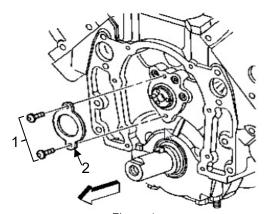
Camshaft Retainer (2) and Camshaft Retainer Bolts (1)
